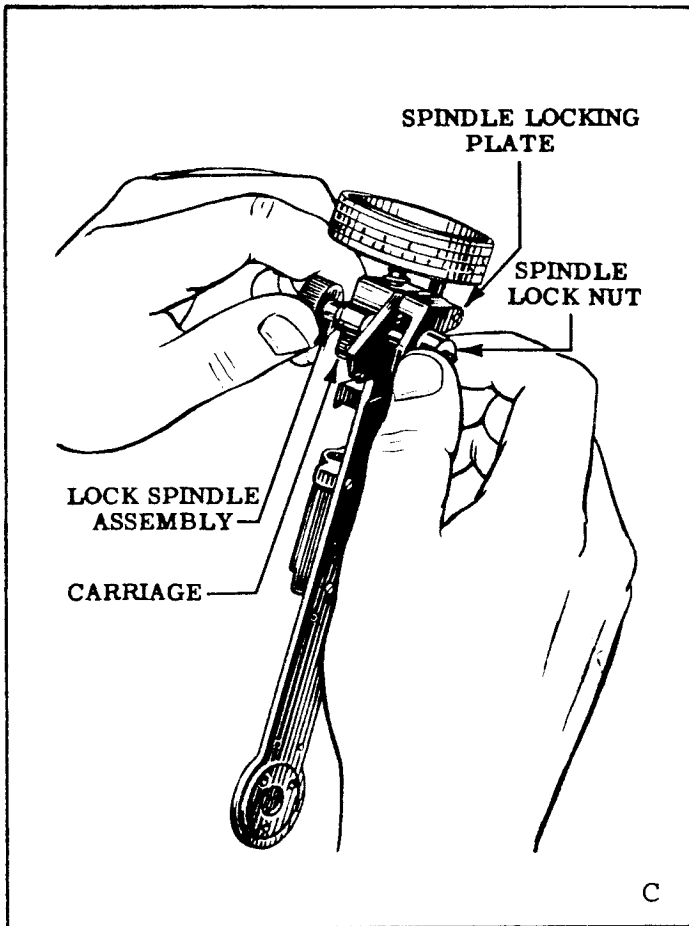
Disassembling the Lock Spindle, Carriage, and Radius Arm Assembly (Sheet 3 of 3)
